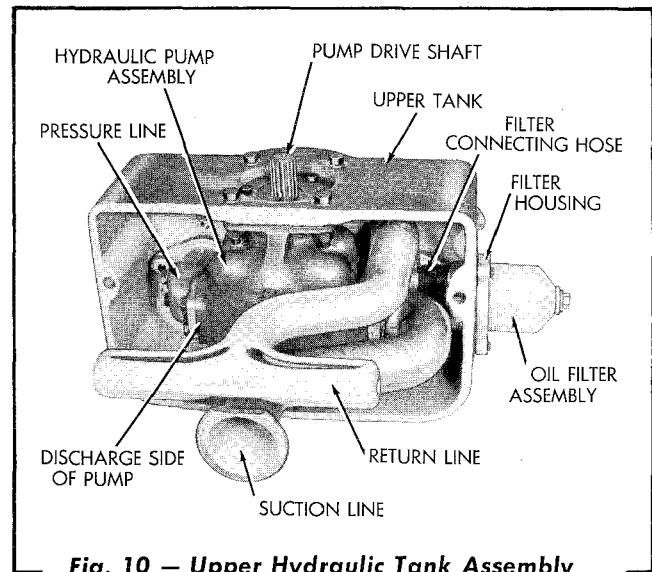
Upper Hydraulic Tank Assembly Bottom View
